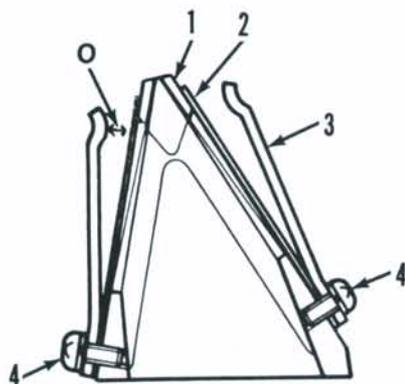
Cross-sectional view of reed block and valves assembly.
